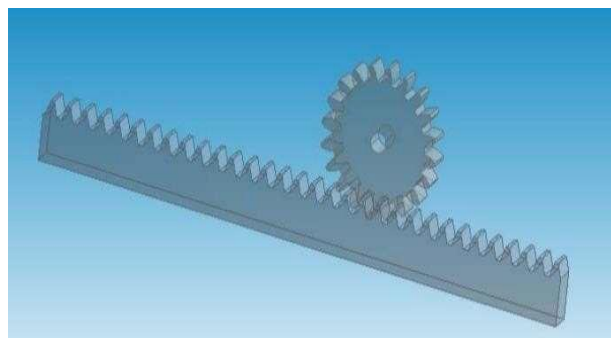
Modelling of Rack and Pinion gear Assembled .
